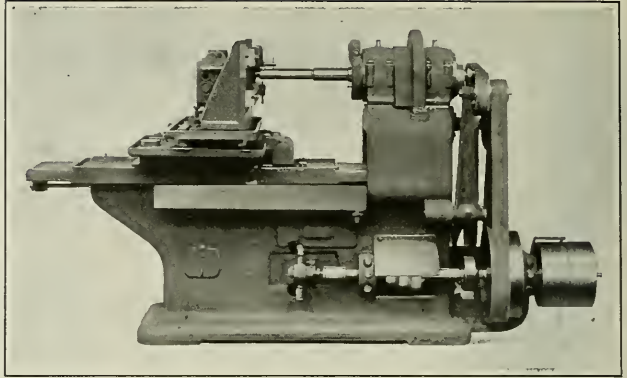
Rear View of Cylinder Grinding Machine showing the Driving Arrangement
